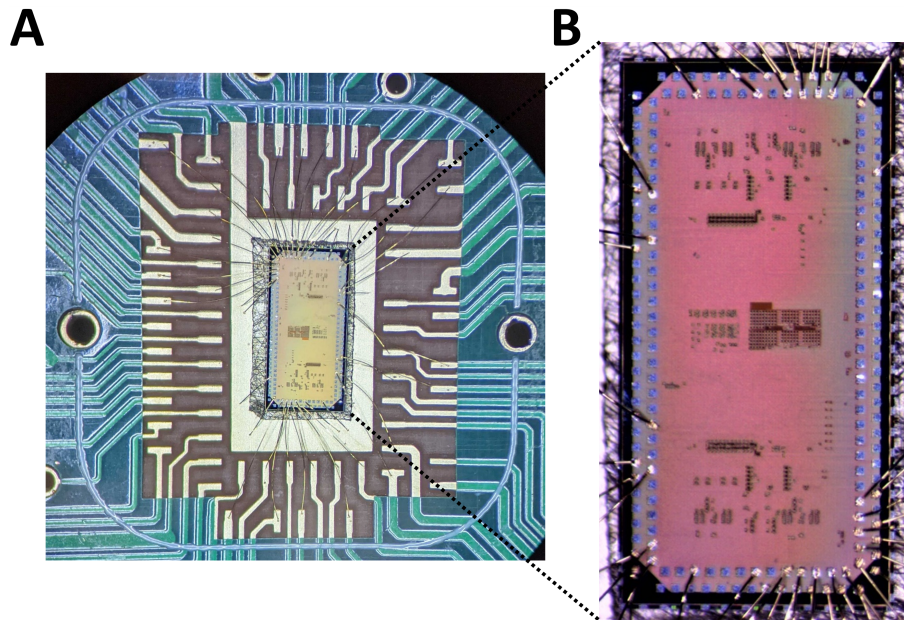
(A) View of chip wirebonded to the board. (B) Zoomed in view of the die.
